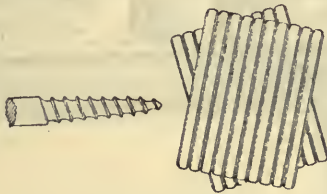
ROLLING THE THREAD ON WOOD SCREWS.
